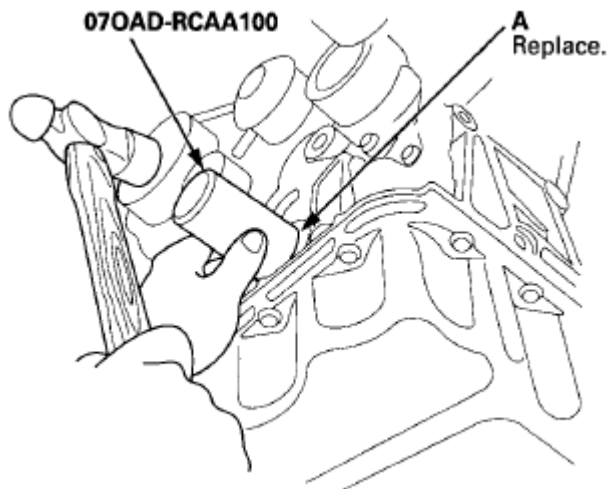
Installing End Crankshaft Oil Seal Using Oil Seal Driver
